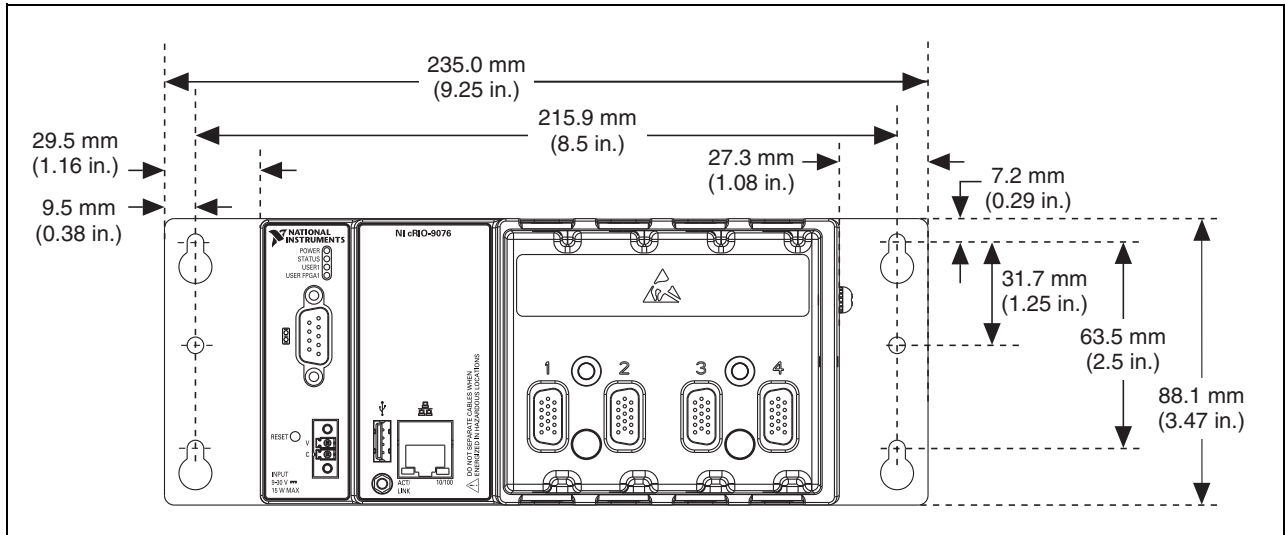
Dimensions of cRIO-9075/9076 with Panel Mounting Plate Installed
